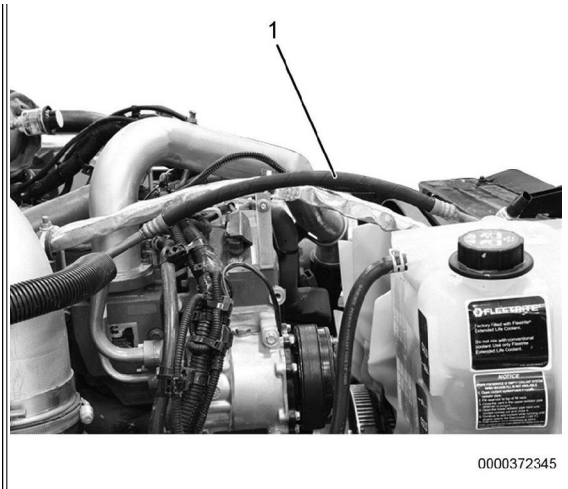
A/C Compressor Discharge Line - Cummins Equipped ProStar 122.
